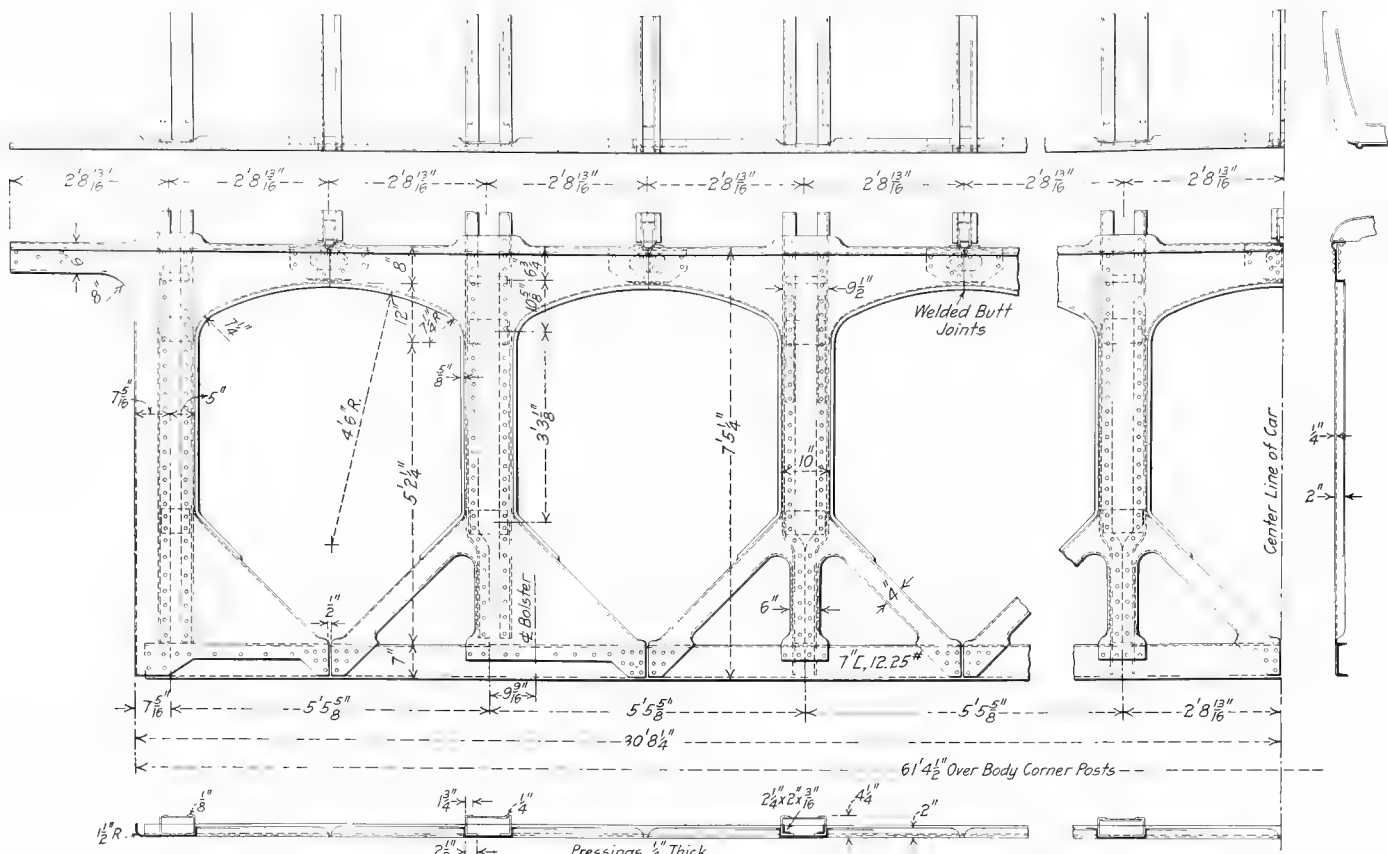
Side Framing of Erie Railroad Steel Suburban Car. Builder, Pressed Steel Car Company.
